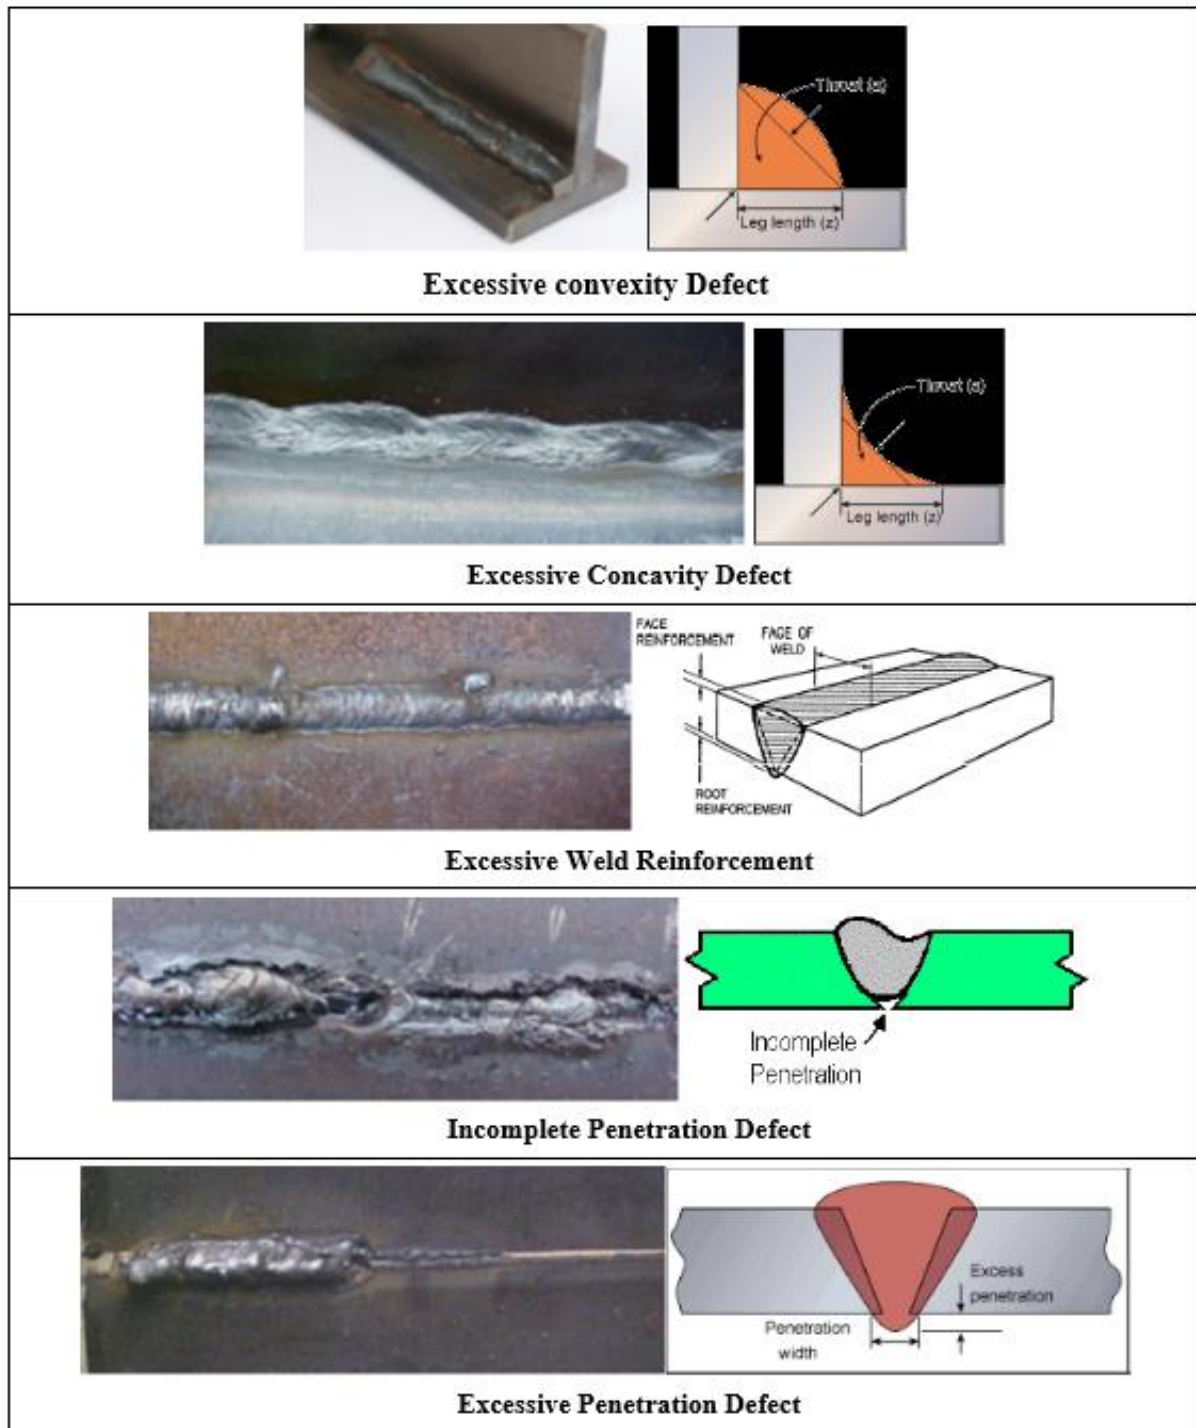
Pictorial Illustration of Weld Defects (Hadžihafizović, 2023)
